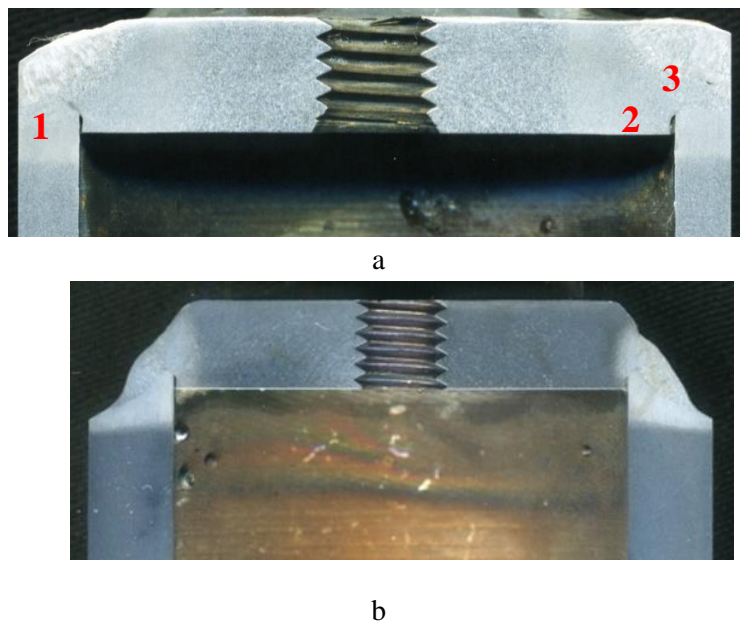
Micro photo of the welded joint a. without beveling b. after beveling.
